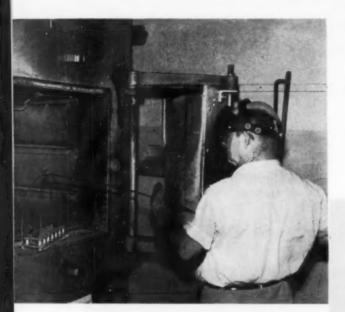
When design permits, parts can be tack welded, eliminating the need for a brazing fixture.
